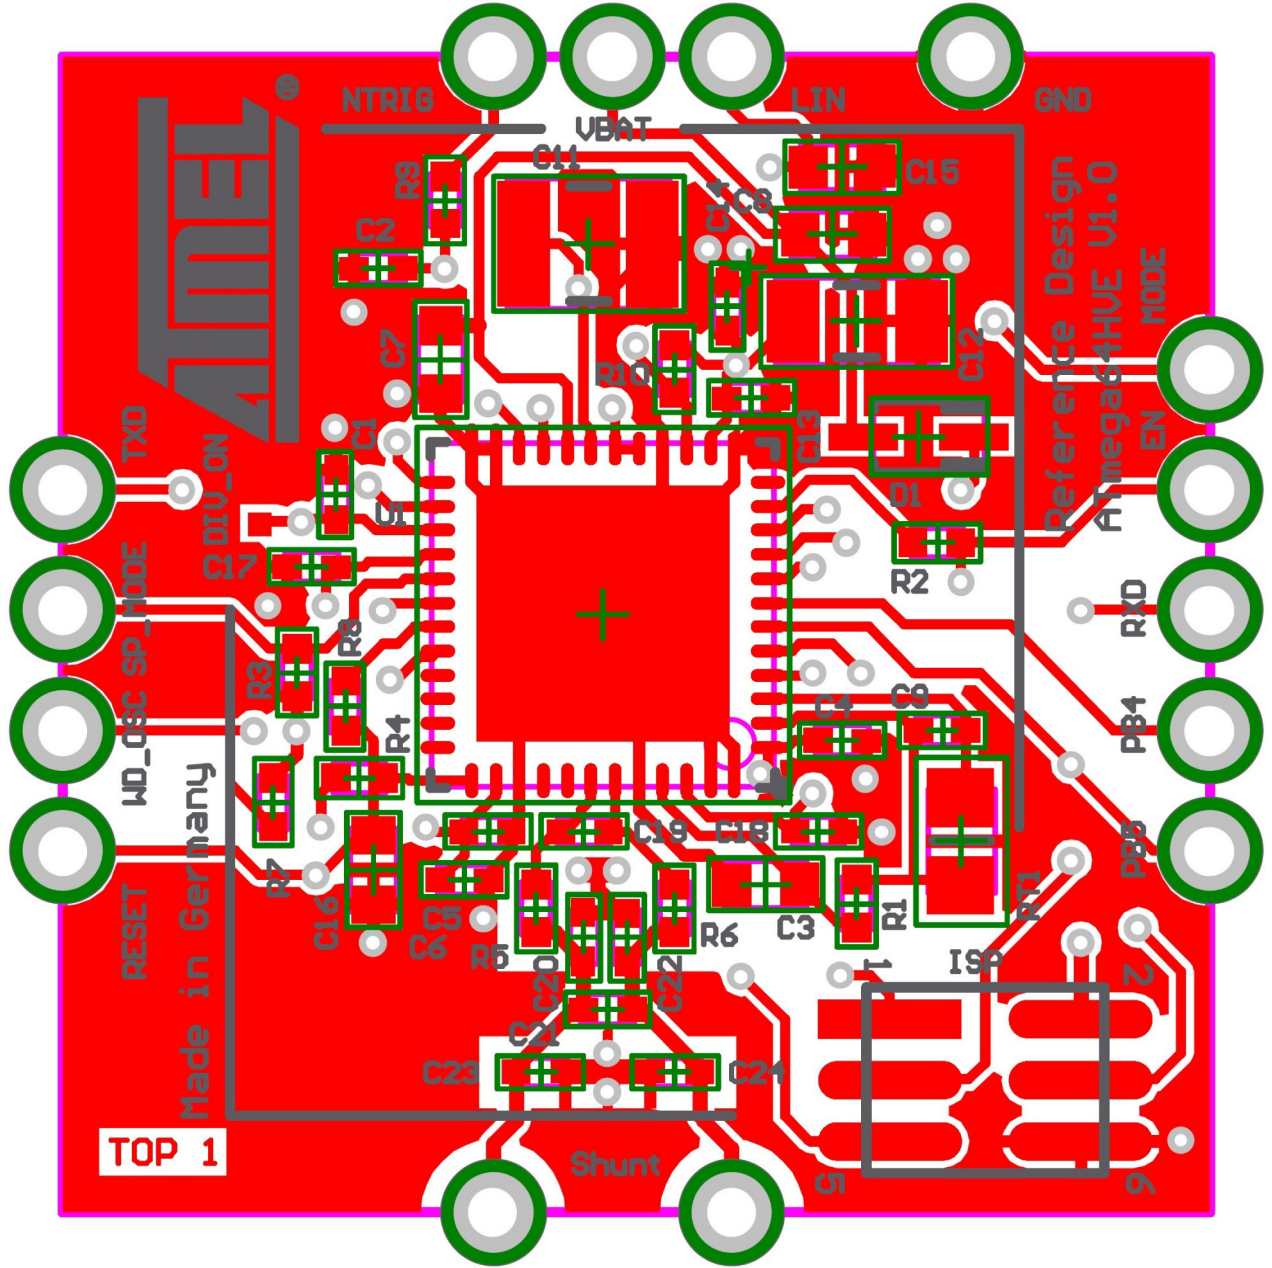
PCB Layout of Reference Design, Mid Layer 1 (View: Top Layer)
